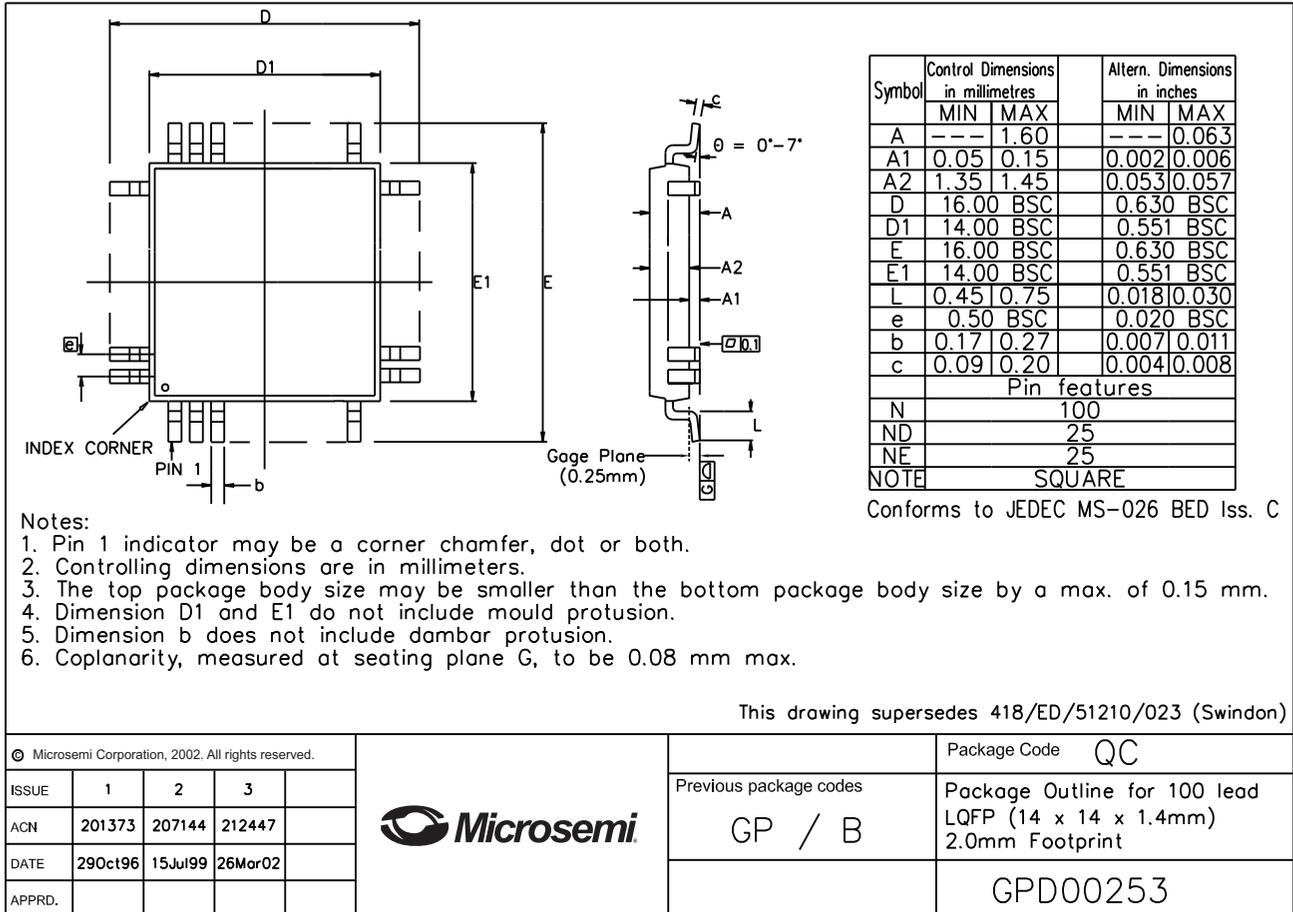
ZL38004 (100-Pin LQFP) Package Drawing
